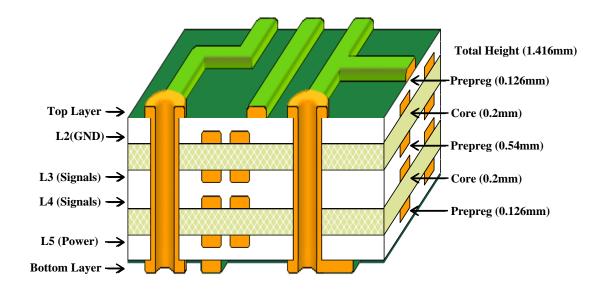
The layer stack-up for 6 layers used in the FPGA board.
